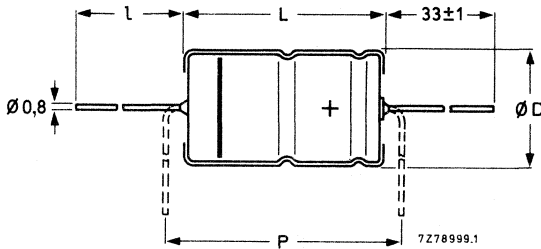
Style 1; see Table 1a for dimensions D, L, I and P.
